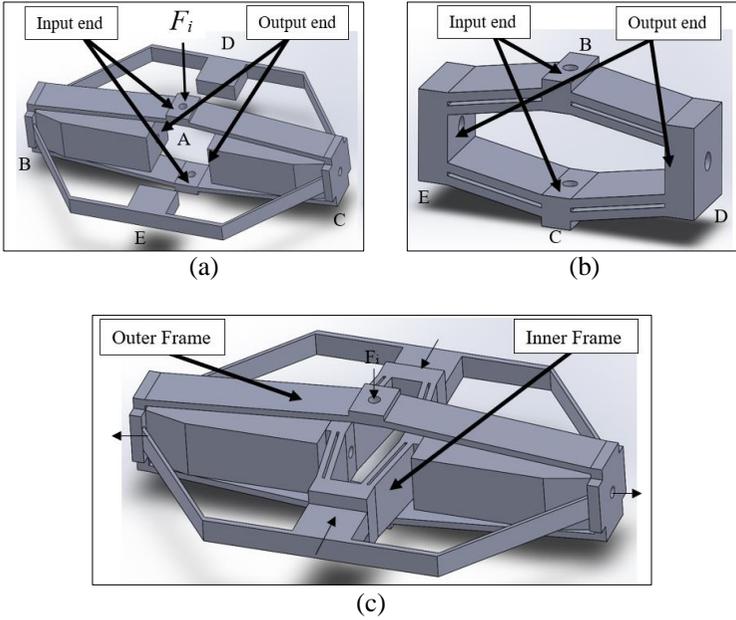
(a) Outer frame; (b) inner frame; and (c) assembly of the outer and inner frame
